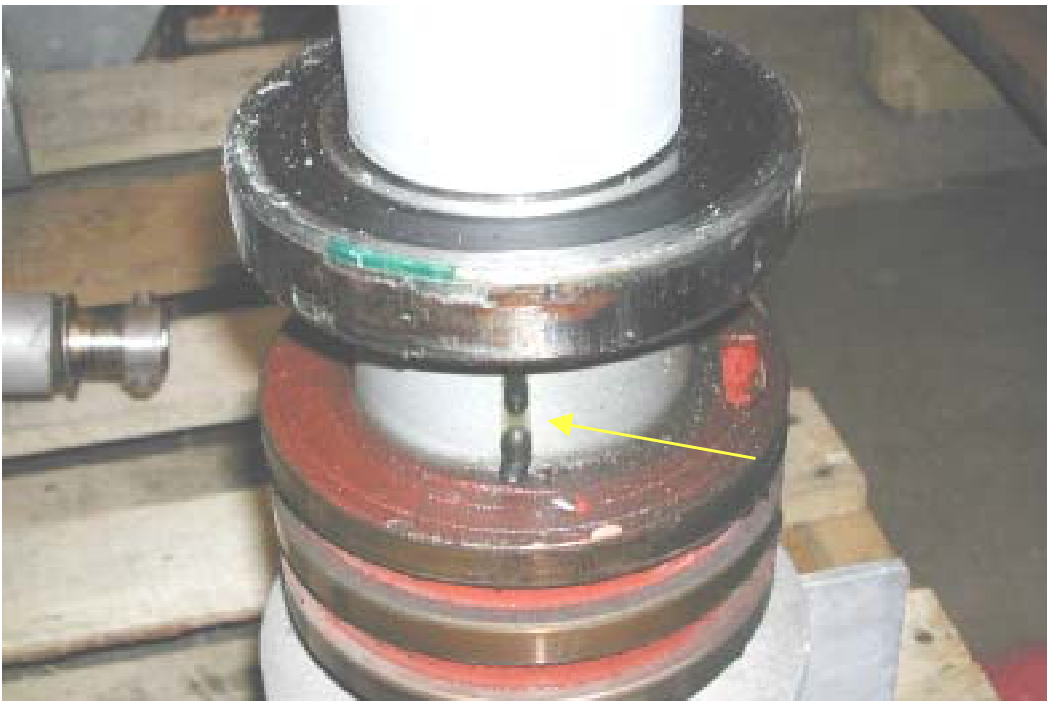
Lower yaw bearing and slip rings. Note grease track from yaw bearing to top slip ring track.
